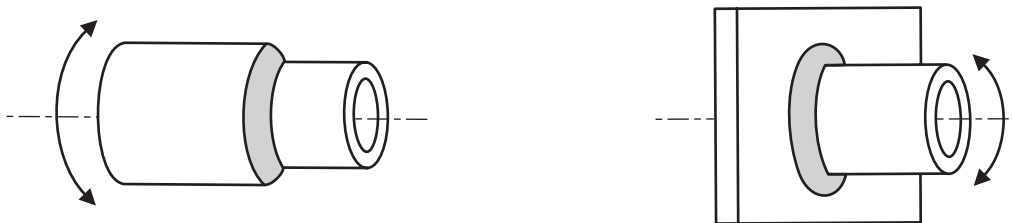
(Continued)—Welding Test Positions and Their Designations for Groove Welds and Surfacing Welds in Pipe
